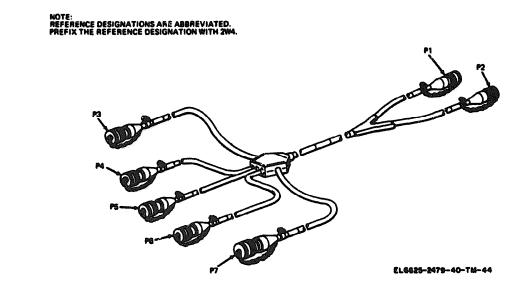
Cable Assembly, Special Purpose, Electrical, Branched CX-12717/AYM-8, parts location.
